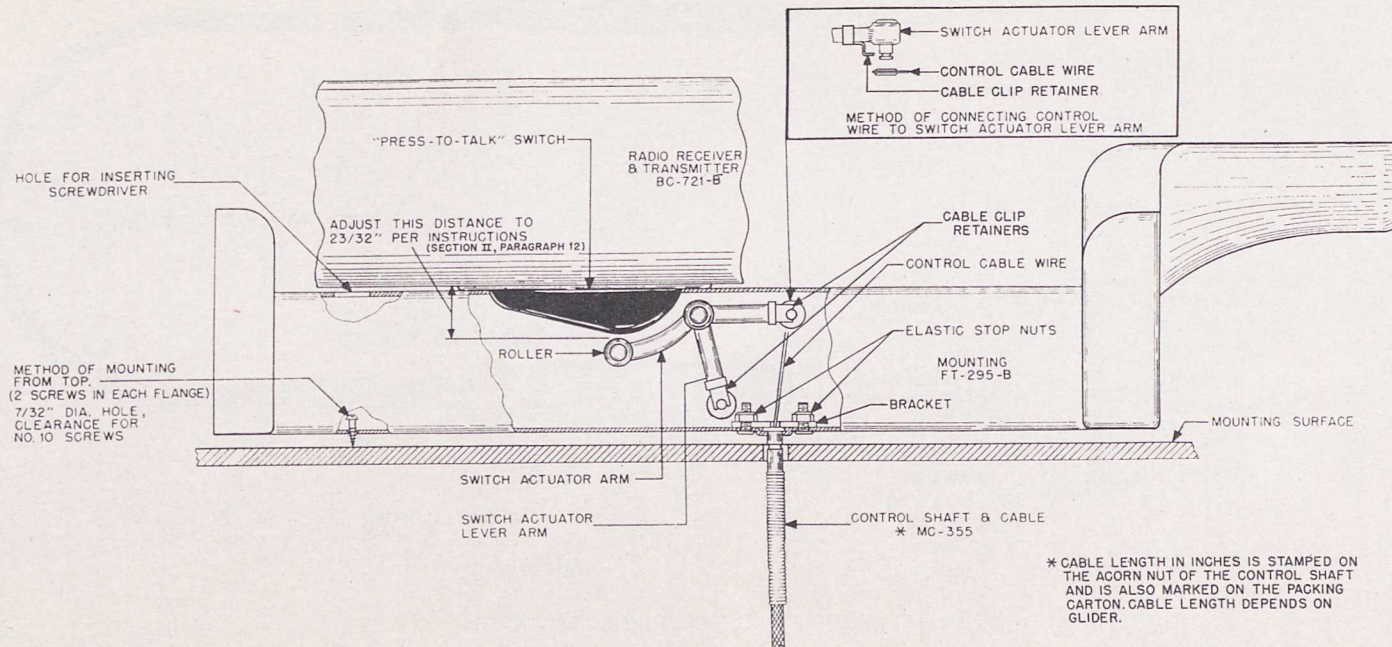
CONTROL SHAFT MC-355, INSTALLATION, SHOWN IN BOTTOM FASTENED POSITION
